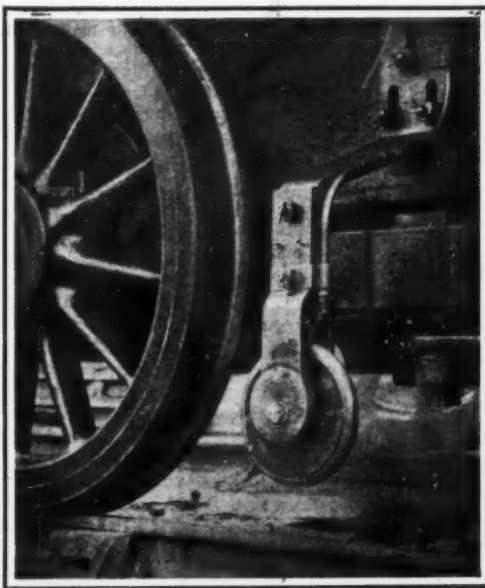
ROTARY SWITCH FIXED ON ENGINE BOGIE, SHOWING SERRATED PLATE FOR CONVENIENCE OF ADJUSTMENT.
